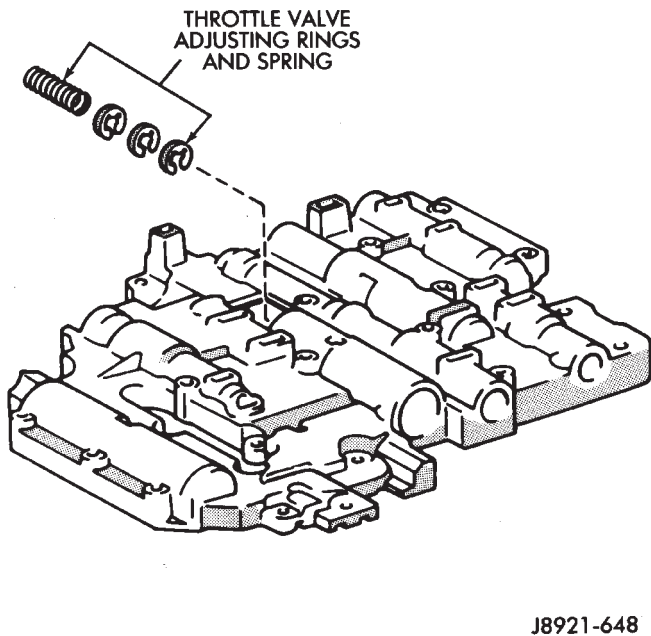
Throttle Valve Adjusting Ring Location (If Equipped)
